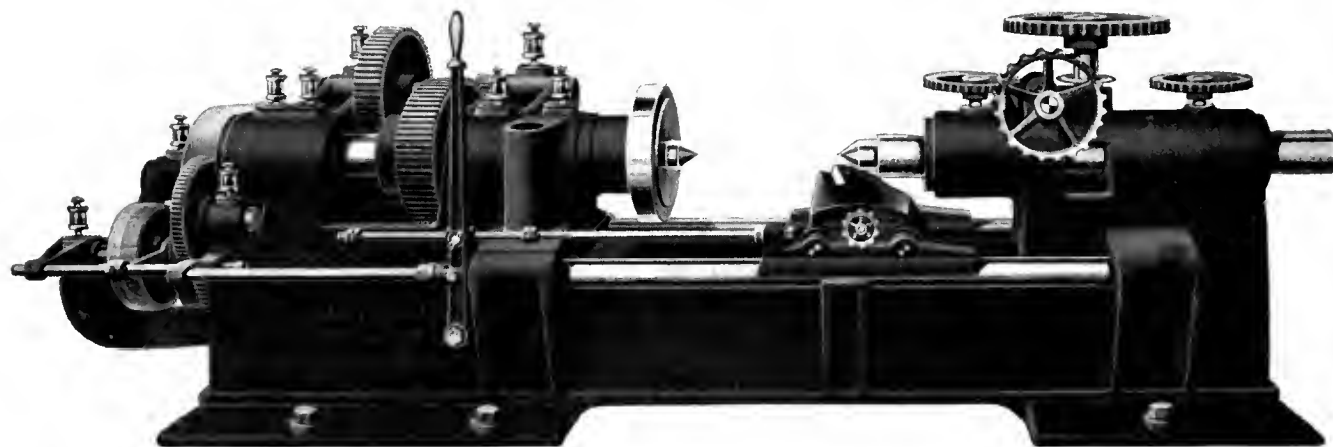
SINGLE PURPOSE MACHINE FOR TURNING SHELLS FROM 4.5 IN. to 12 IN. DIA.
